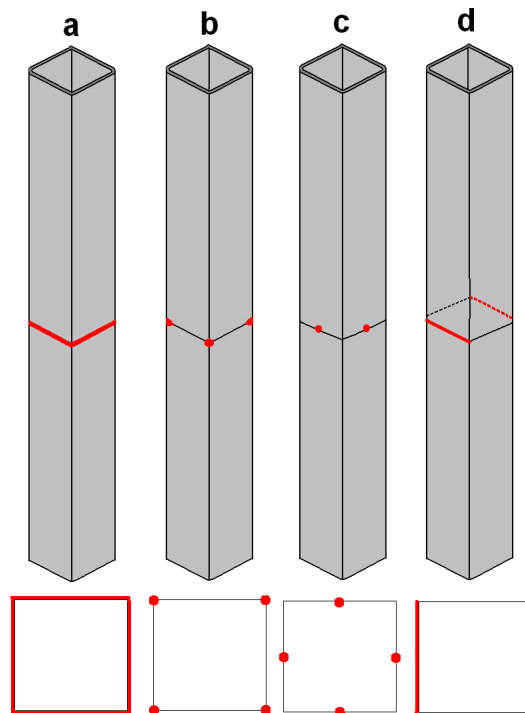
Weld configurations: (a) four-sided seam weld, (b) four corners spot welds, (c) four-sided spot welds and (d) two-sided seam weld.
